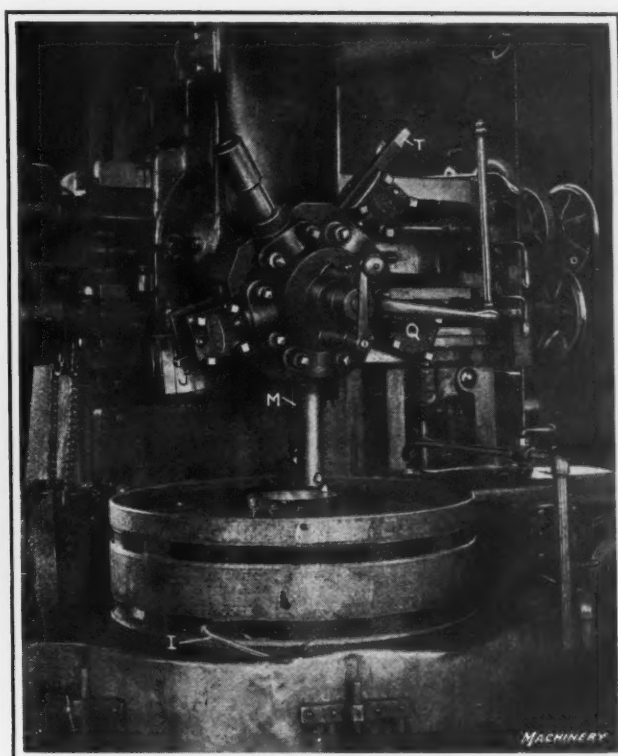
Vertical Turret Lathe equipped for performing Second Sequence of Operations on Packard Five-ton Truck Wheels
